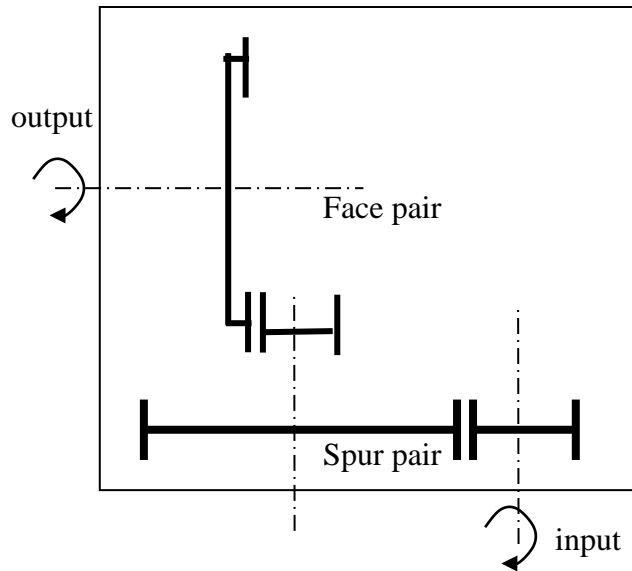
Conceptual layout of face pair and spur pair transmission [13]
